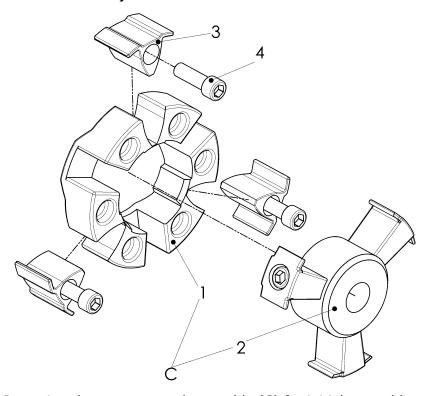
Preparing the pre-mounted assembly (C) for initial assembly (design -1000...3000)
